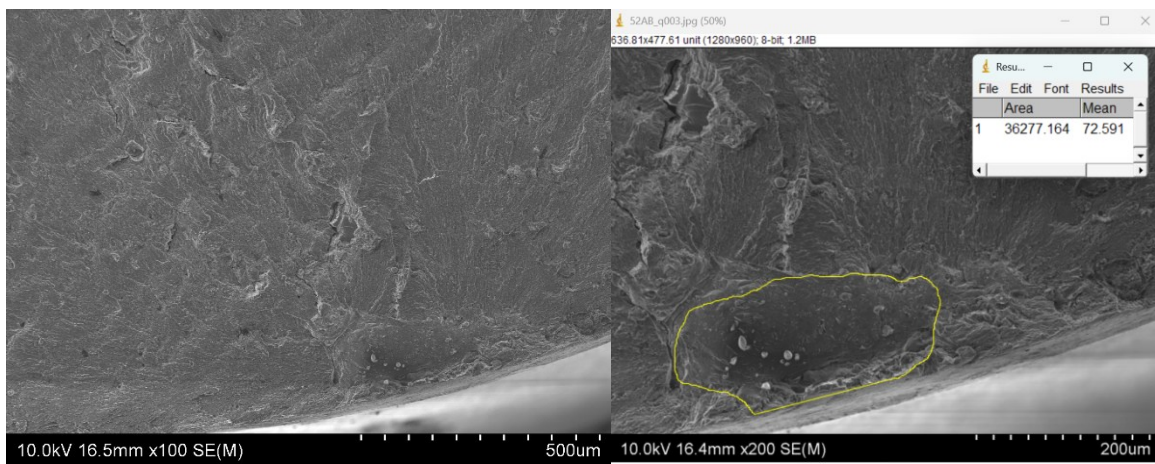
Fracture surface of sample CD//BD-HT-7 a) x100, b) x400.
